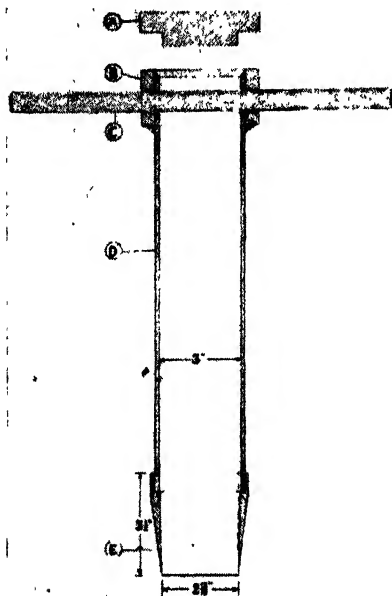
Soil sampling tube. A, steel drive cap; B, $\frac{1}{2}$ X 2 inch shoulder strap welded to tube; C, $\frac{3}{4}$ inch removable rod handle; D, $\frac{3}{4}$ X 3 X 14 inch cold drawn seamless steel tube; E, removable, case-hardened steel bit.
